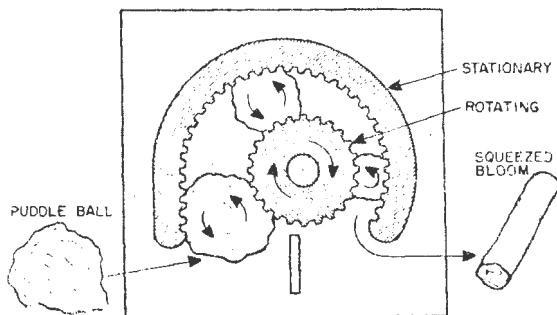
13. Schematic representation of the path of a puddle ball passing through a Burden squeezer.
